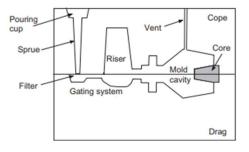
Schematic diagram of a sand-casting mold, showing the upper half(cope), lower half (drag), and core in place. [4]
